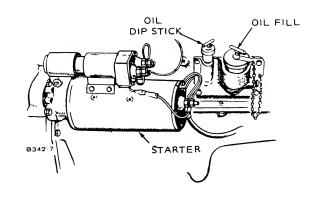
OIL FILL AND DIPSTICK LOCATIONS
